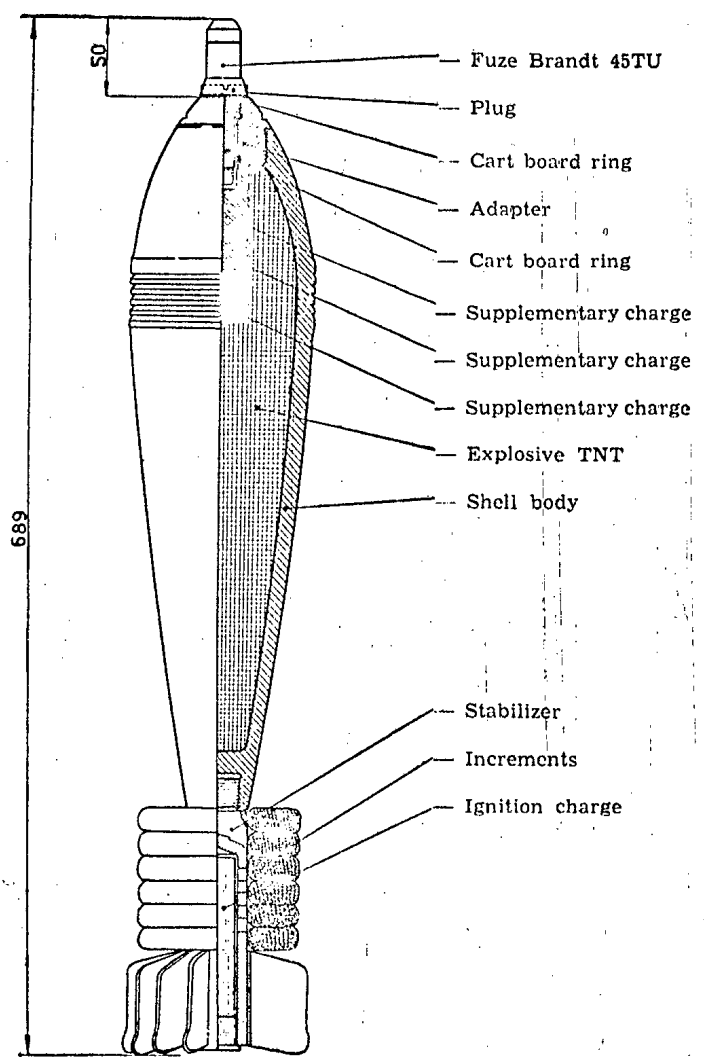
High explosive Mortar shell M 49 (heavy)
